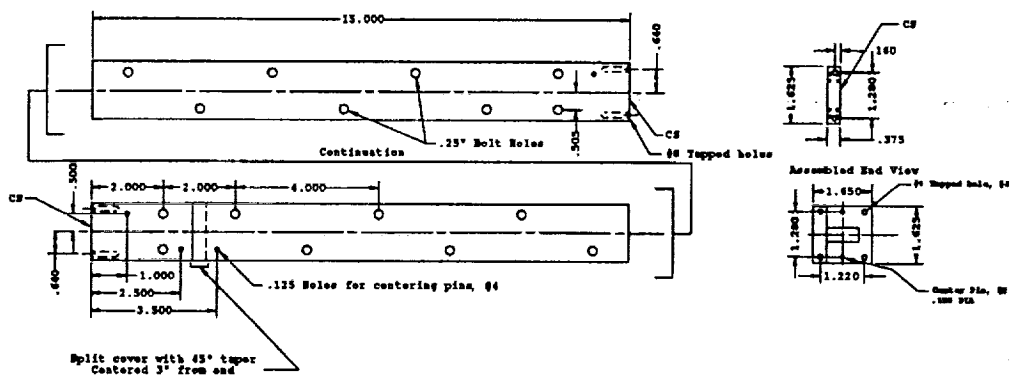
Mechanical drawing for stainless steel, X-band waveguide fixture.
